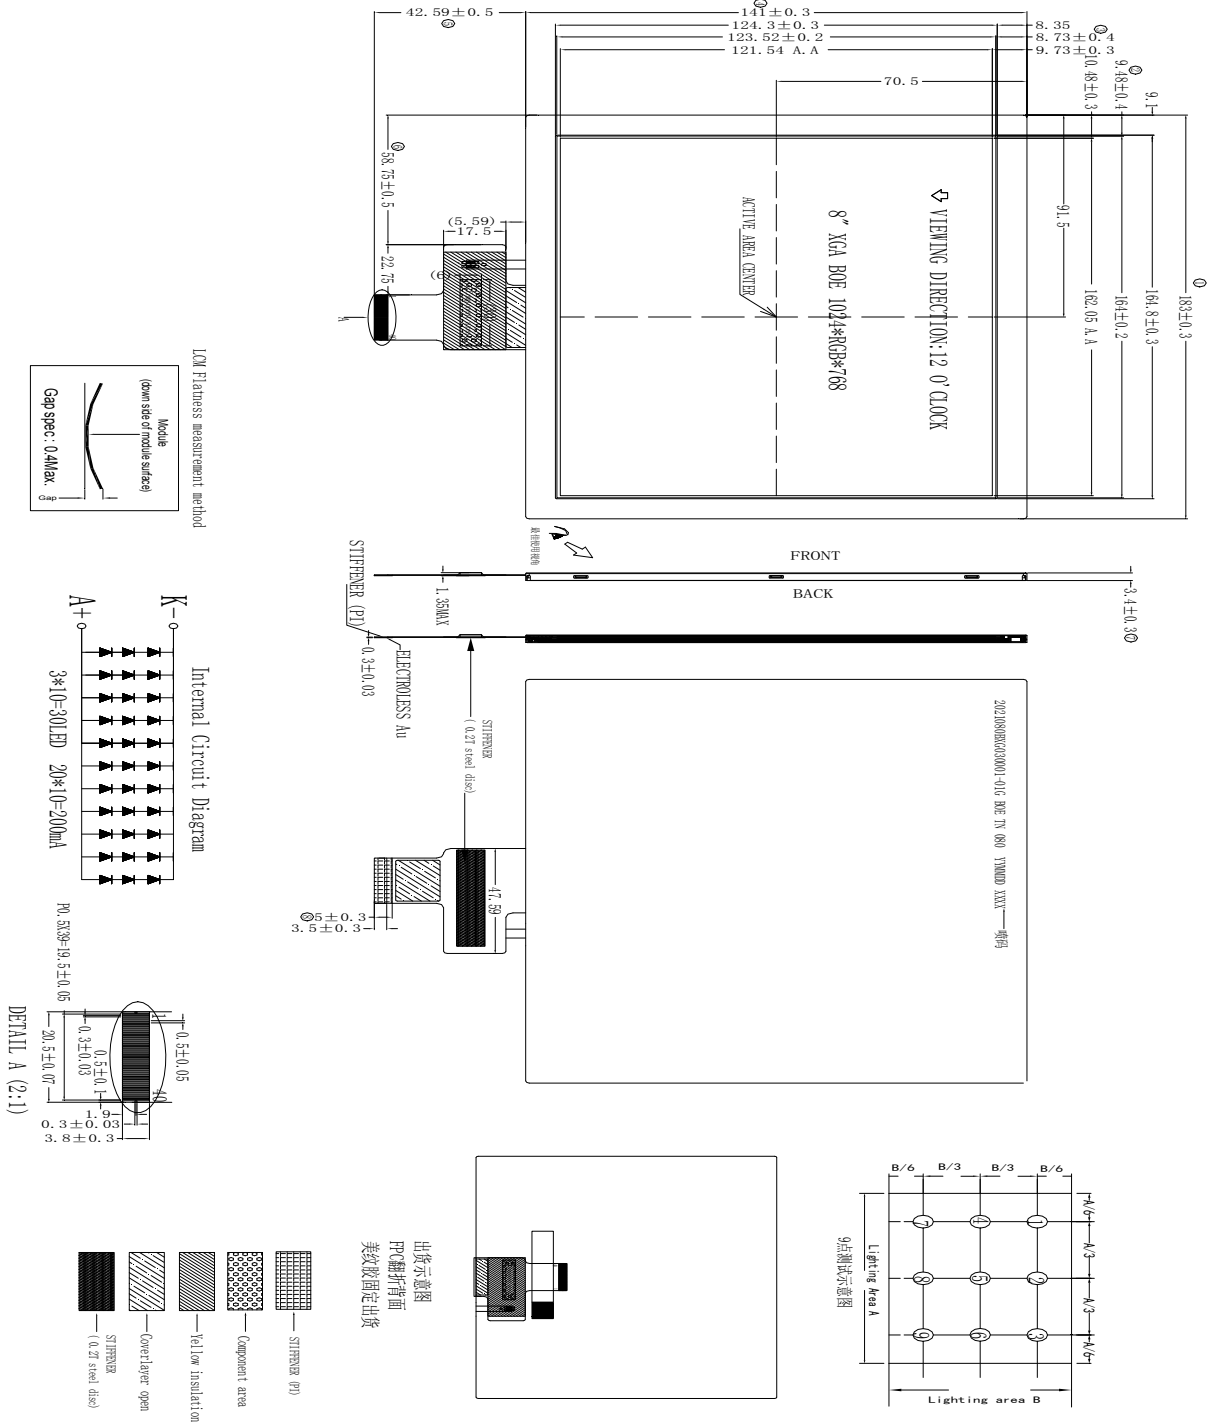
TFT-LCD Module Outline Dimensions (Rear view)
